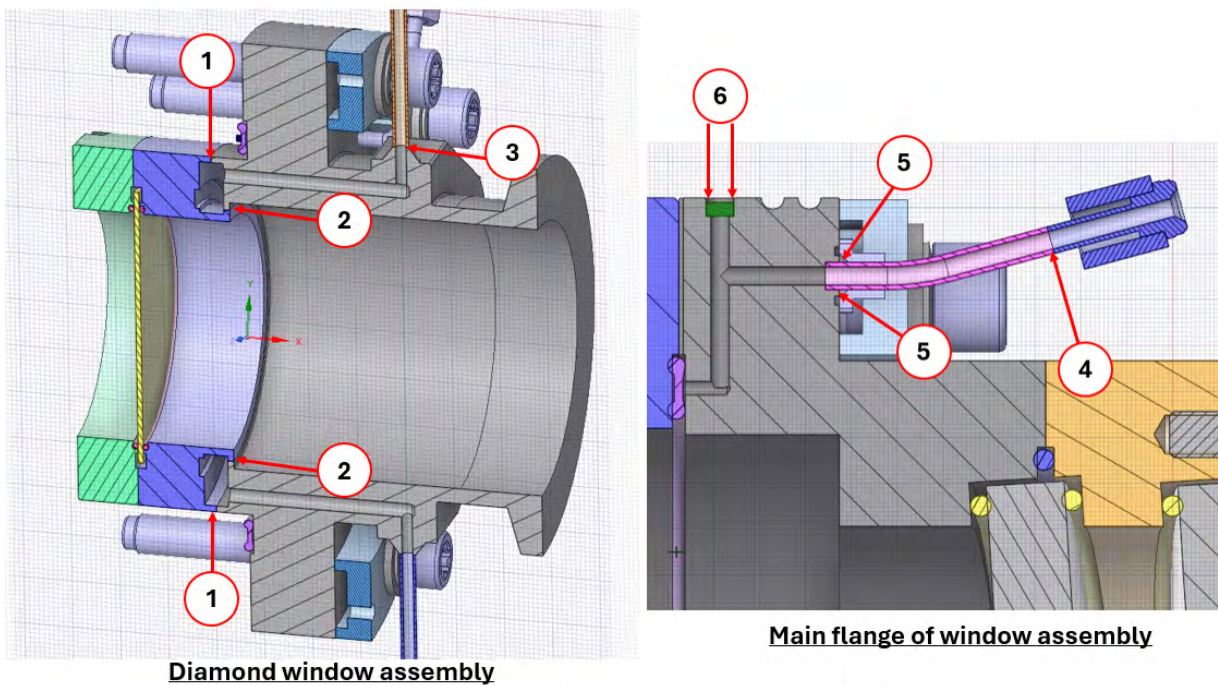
Joints requiring welding: full penetration welding for joint 1 to 4 and fillet welding for joint 5 & 6
